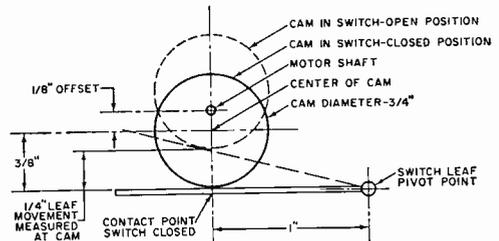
Dimensions shown must be followed closely to insure correct cam and switch action.
